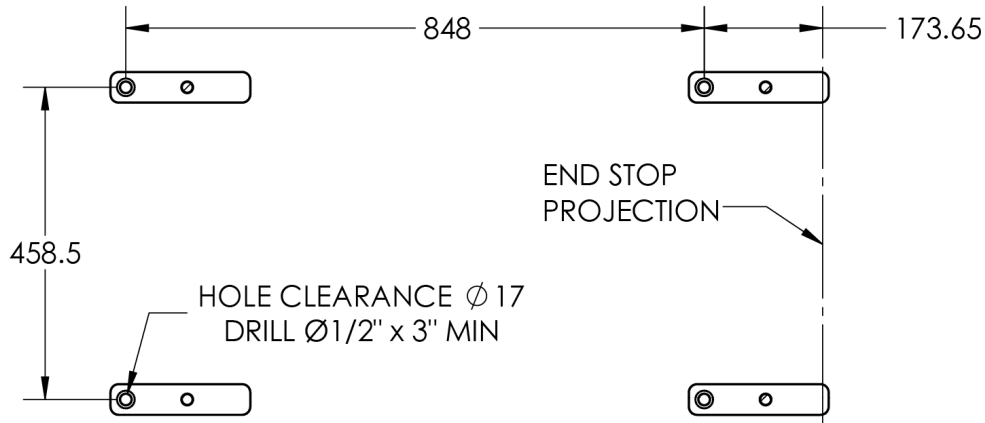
Smart Infeed 100 Anchoring Layout
